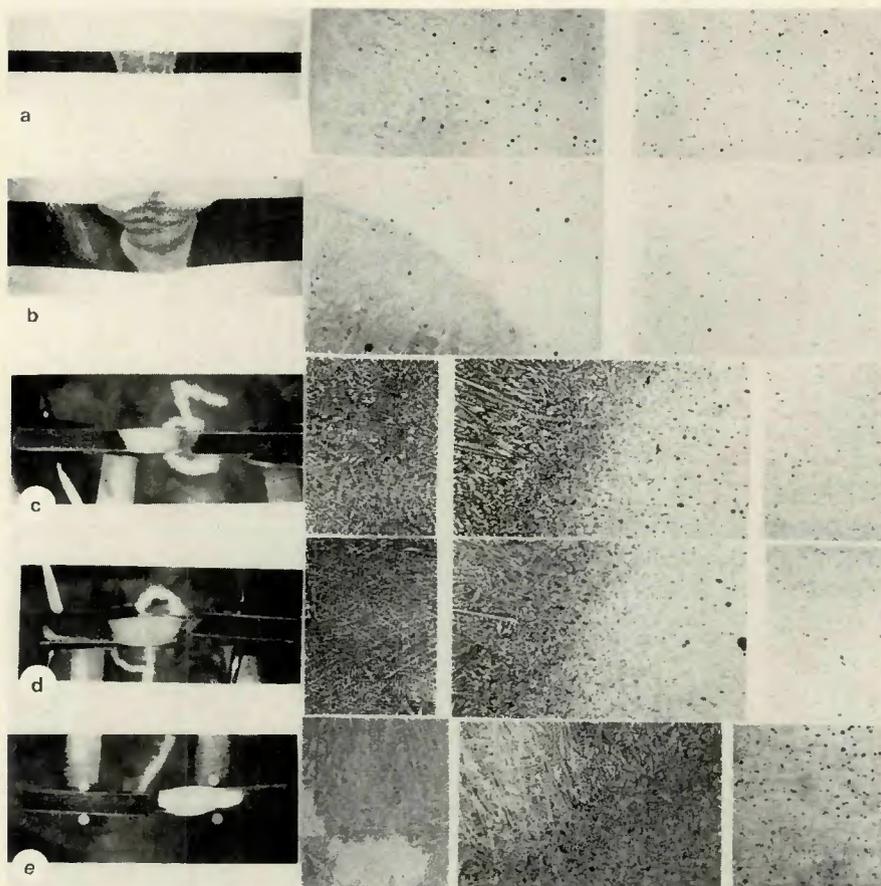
Microstructures of typical butt welds. Weld cross section is shown at left (5X) with the weld zone, weld/base metal interface and base metal microstructures shown at right (100X). From top to bottom: (a) as-welded Inconel 706 (glyceresia etch); (b) aged Inconel 718 (glyceresia etch); (c) aged Inconel 718 tested at room temperature (electrolytic etch); (d) aged Inconel 718 tested at 1200 F (649 C) (electrolytic etch); (e) aged Inconel 718 tested at 1400 F (760 C) (electrolytic etch). All photos reduced 40%
